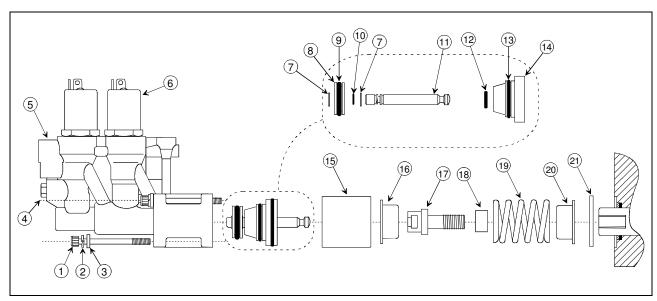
Model V20 SOL-E Solenoid Actuator Assembly
